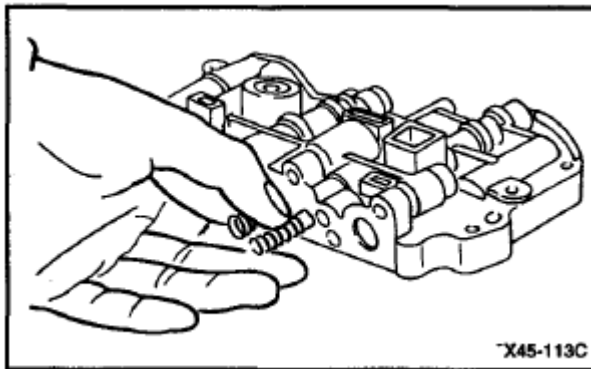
Removing/Installing Torque Converter Control Valve & Torque Converter Control Spring
